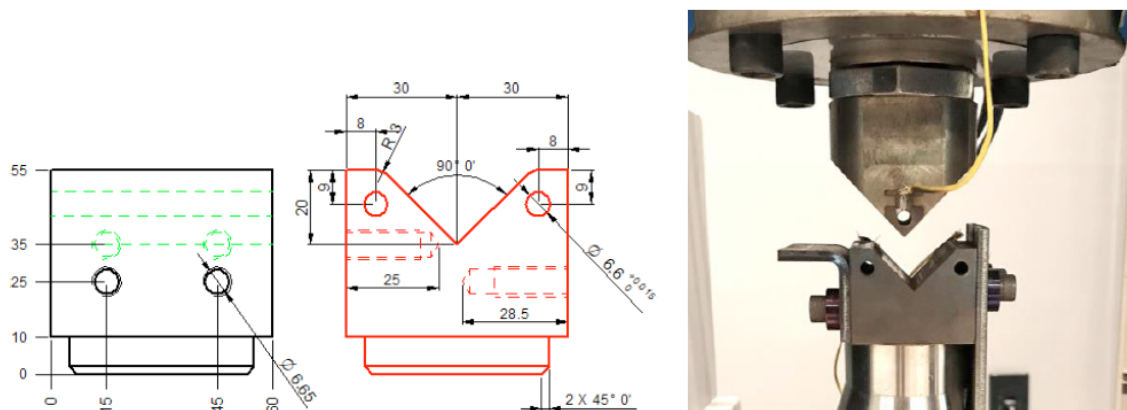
(a) Technical drawing of the die with front and side views. (b) Die and punch manufactured according to the dimensional design.
